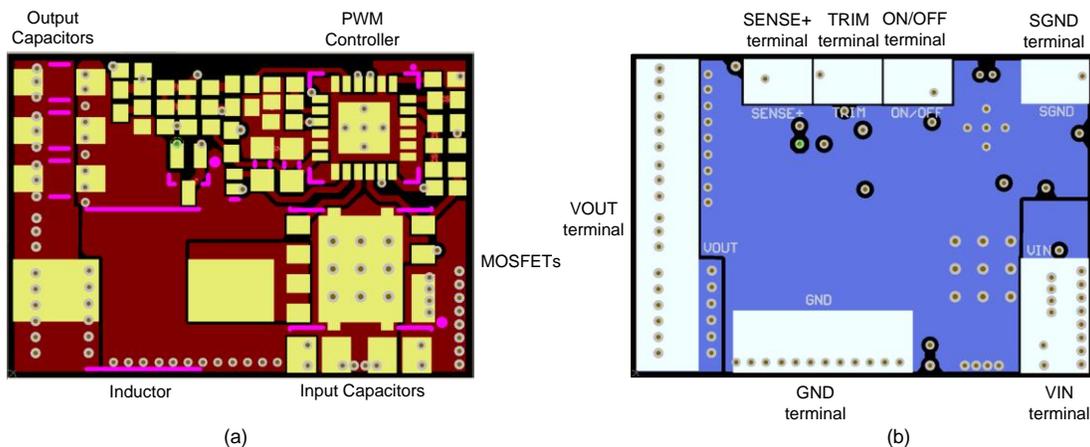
PCB layout (top down view): top layer (a) and bottom layer (b).
